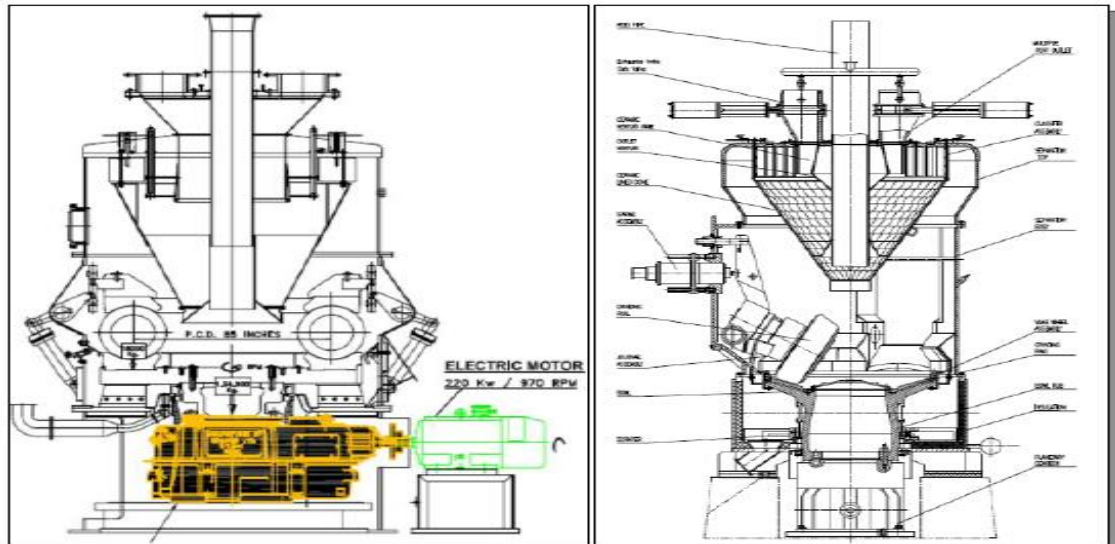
Bevel helical and bevel planetary gearboxes (Pawar & Mukhopadhyay, 2015)
